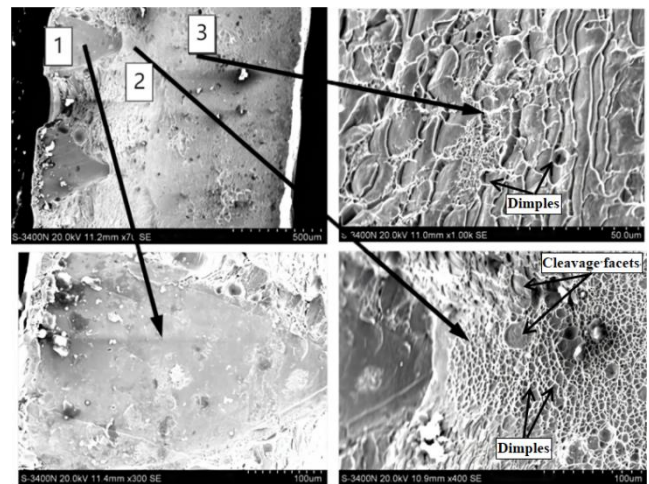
Fracture morphologies of tensile specimens with a heat input of 2.125 kJ/cm
